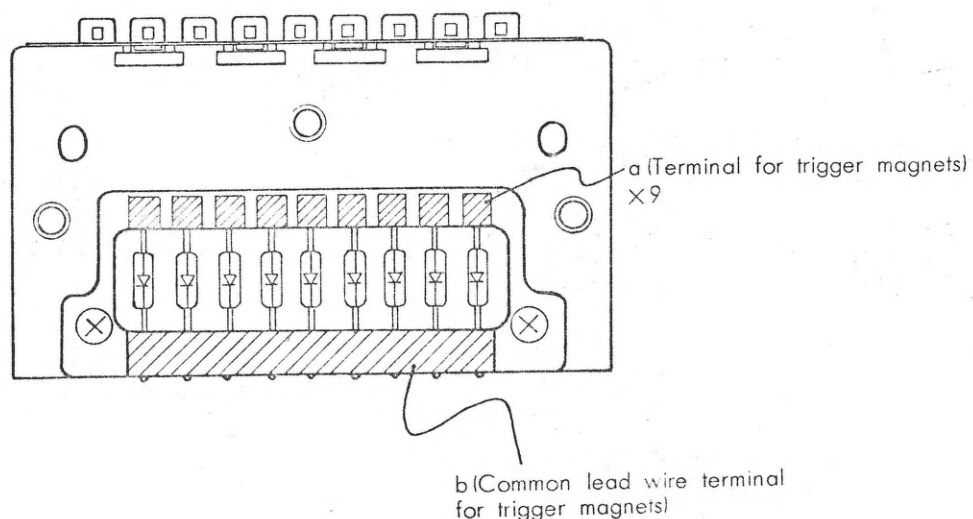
TRIGGER MAGNET ASSEMBLY
